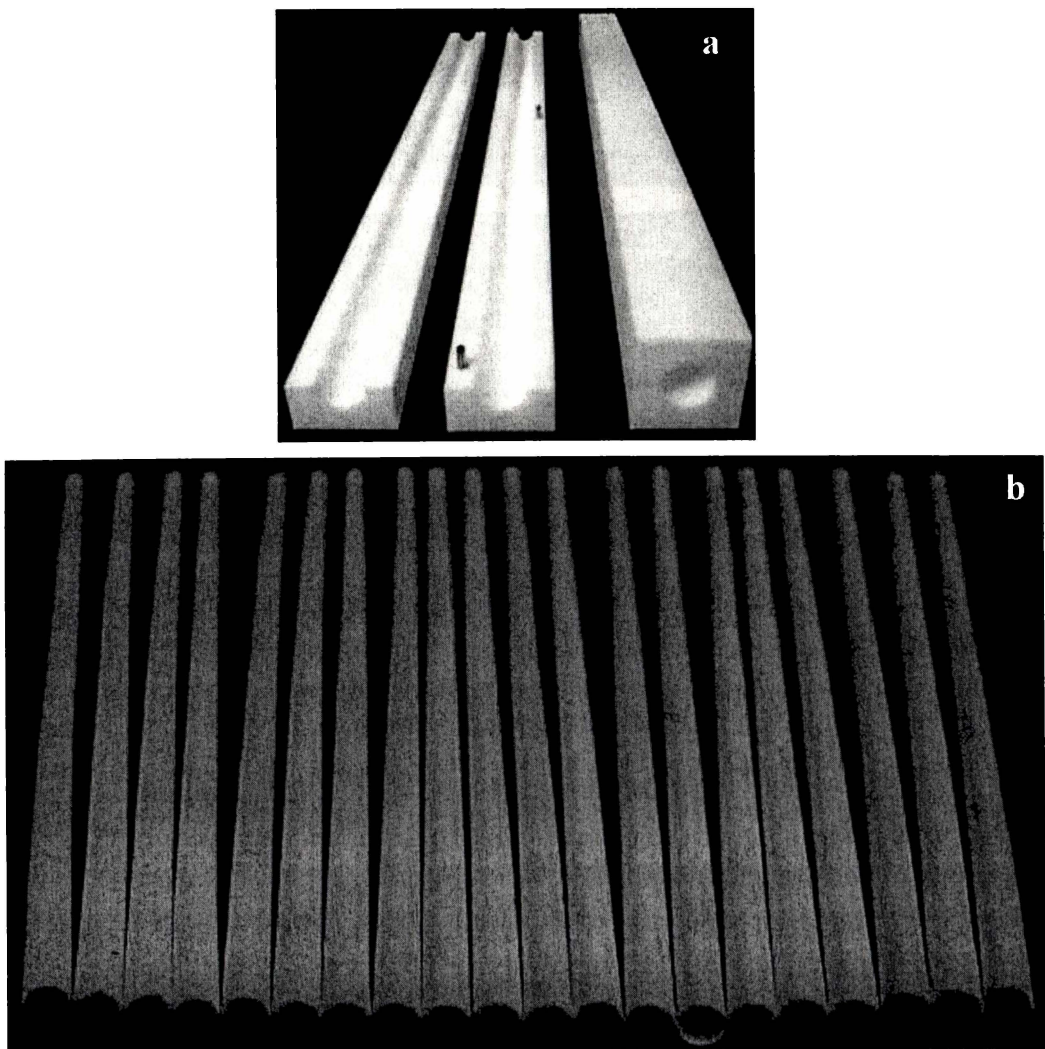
Photographs of (a) C-Shaped Plastic Tube Holders and (b) Dried Tubes.
